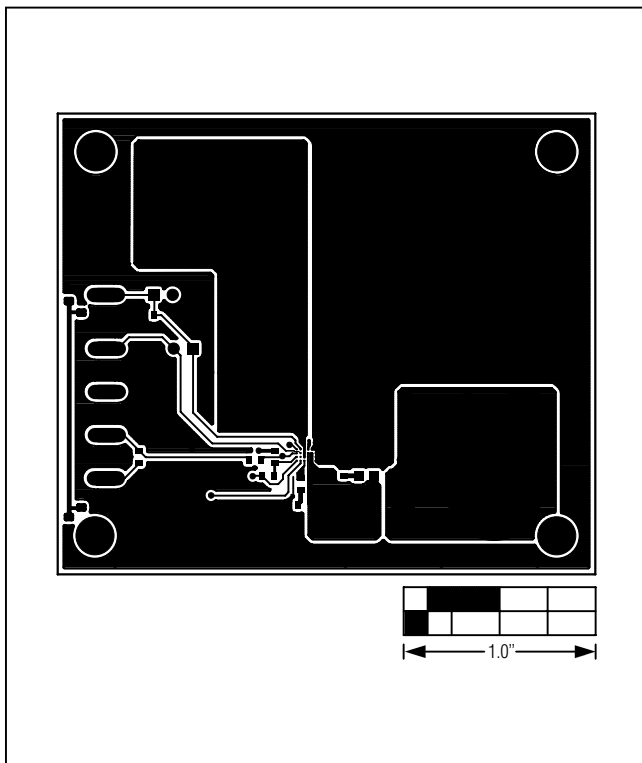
MAX15112 EV Kit PCB Layout—Component Side
